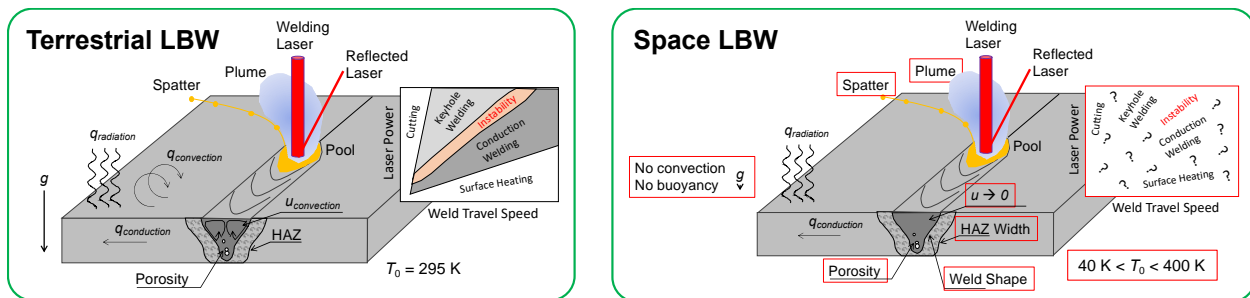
Comparison of Terrestrial Laser Beam Welding (LBW) and Space Laser Beam Welding physics and modeling opportunities (in red) required to improve space welding predictions.
